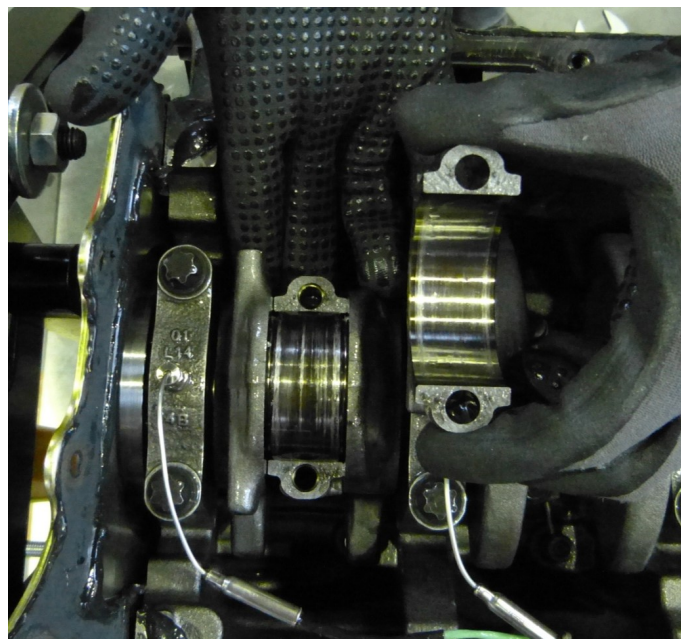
Journal bearing seizure: the bearing shell was starting to weld to the shaft.
